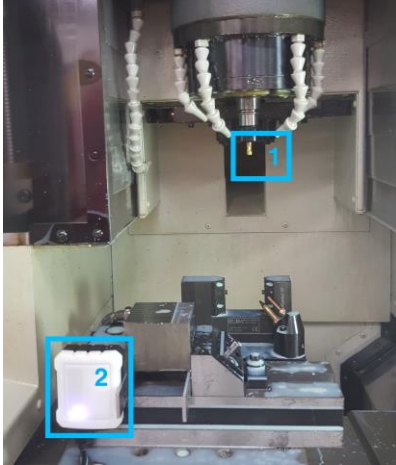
A MORI SEIKI NVD1500DCG MILLING MACHINE WITH CUTTING TOOL (1) AND SENSOR UNIT FROM INFINITE UPTIME (2)
